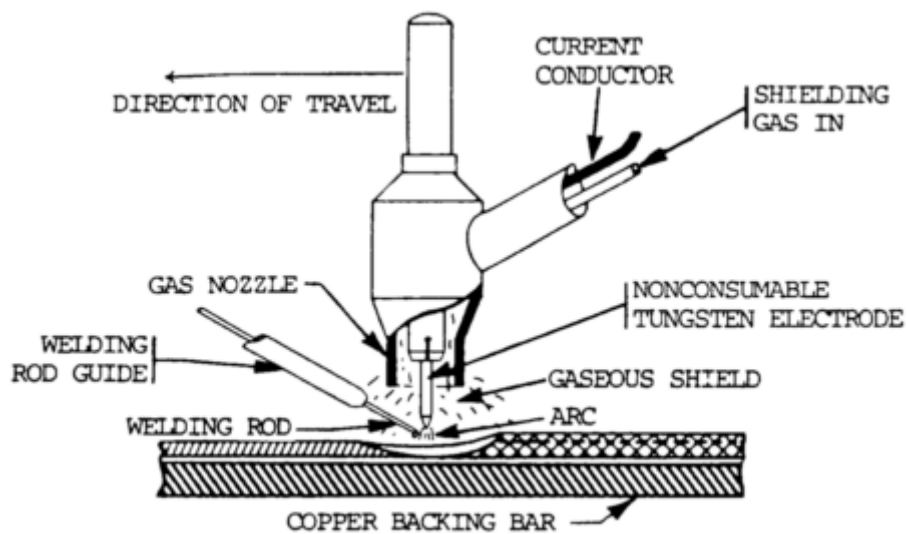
Principle of tungsten inert gas (TIG) welding (Ericsson, 2002)
